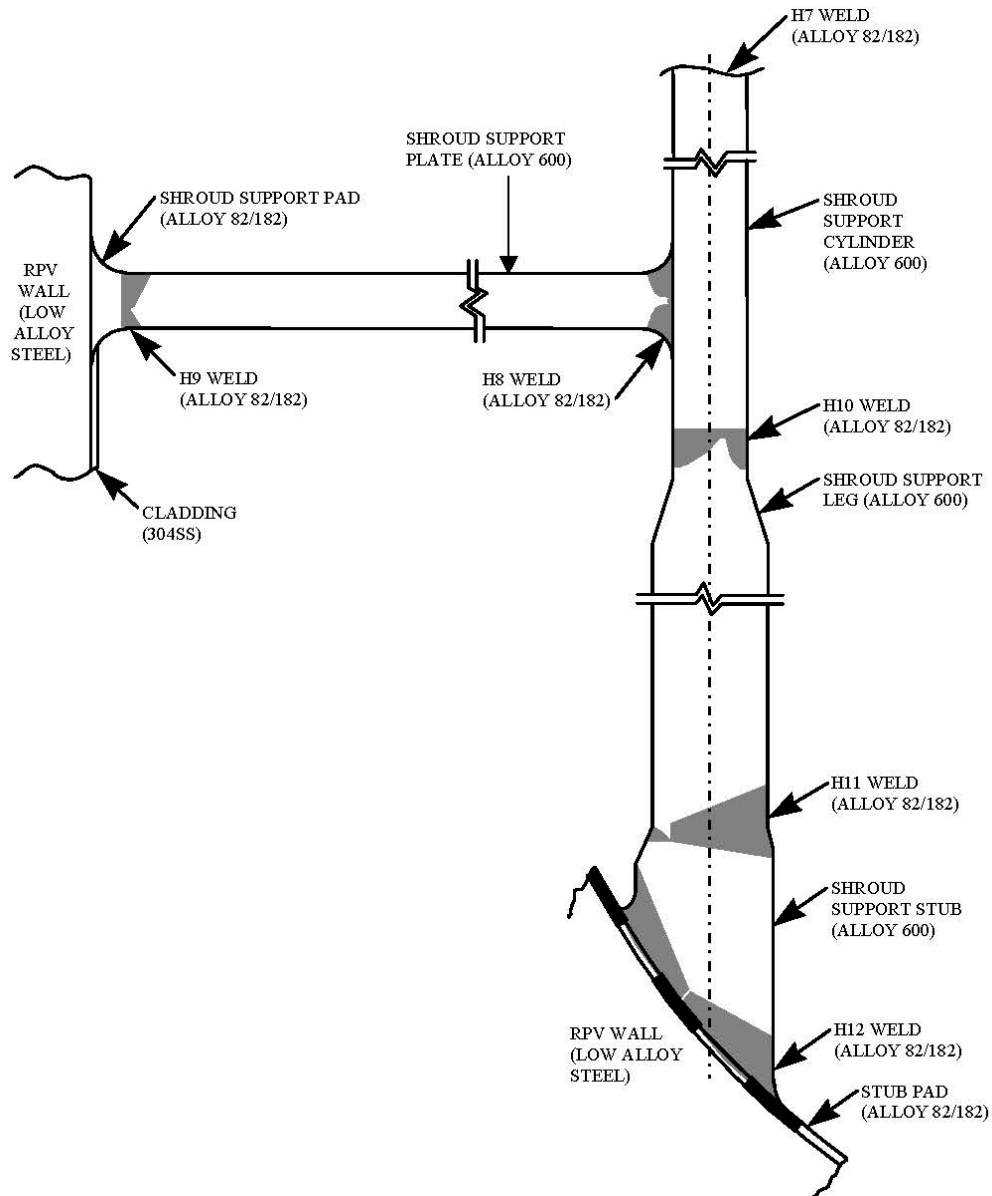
Typical BWR shroud support structure of the leg design with Alloy 182 used throughout. Also shown are the H9 and H12 welds that join the component to the RPV.
